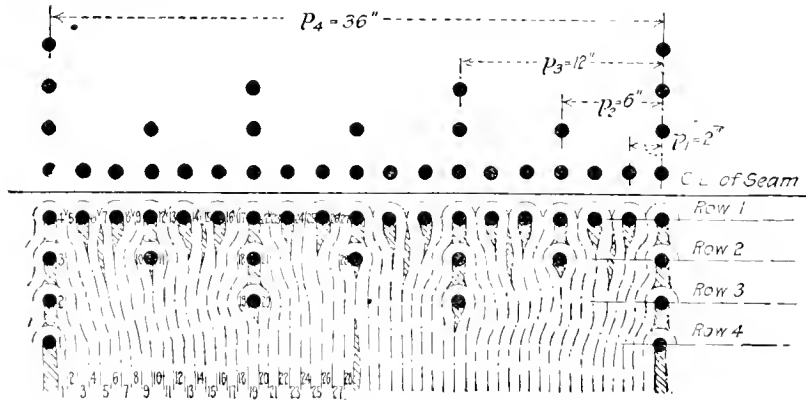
LAYOUT OF A QUADRUPLE-RIVETED BUTT JOINT
